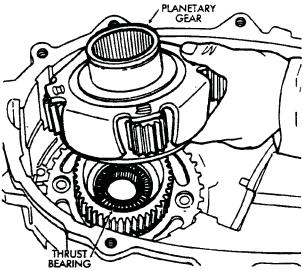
Remove Planetary Gear and Thrust Washer
